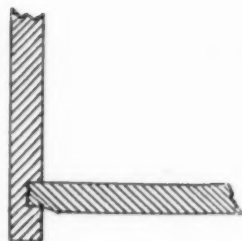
Detail drawing showing how ends of tank are crozed into sides and bottom.
